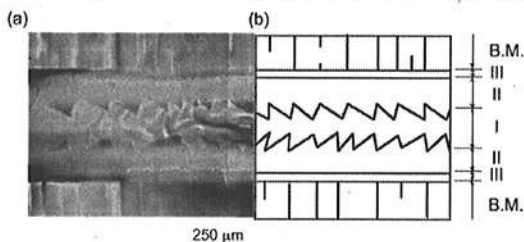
(a) Bead appearance of the welded specimen at the welding speed of 6 m/min, (b) schematic illustration of different zones in the weld bead.
